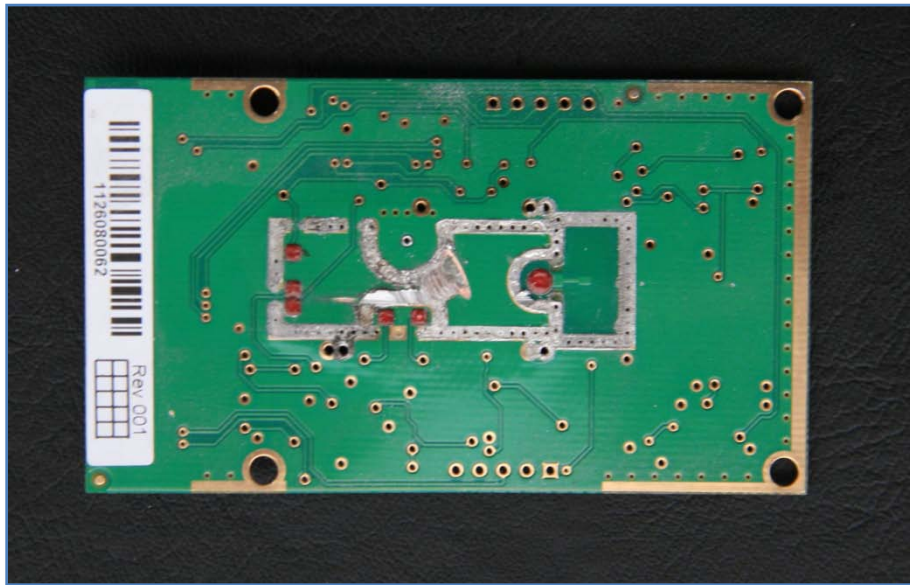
Sensor PCB Rear: Resonant Cavity Removed
